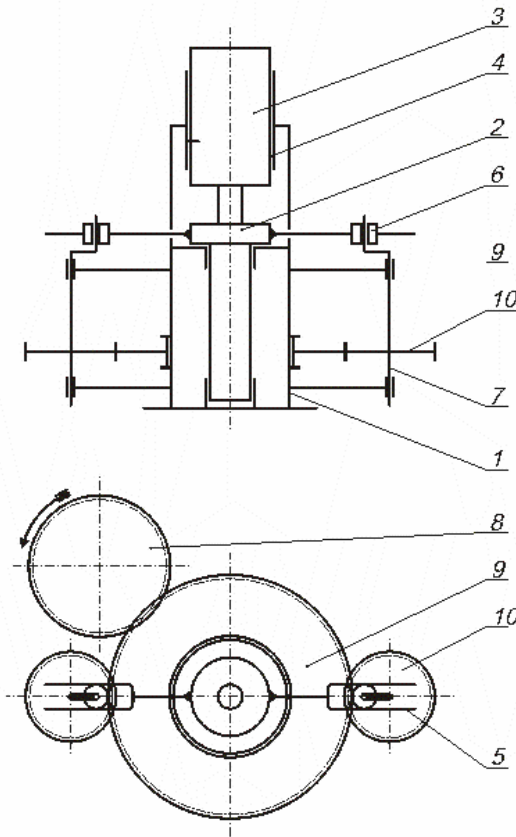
Kinematic diagram of compression unit with oscillatory torsion: 1 – body, 2 – lower punch, 3 – upper punch, 4 – non-rotating slidable bearing, 5 – fork – lower punch arm, 6 – roller, 7 – crankshaft (eccentric), 8 – driving gear, 9 – toothed ring, 10 – gear
